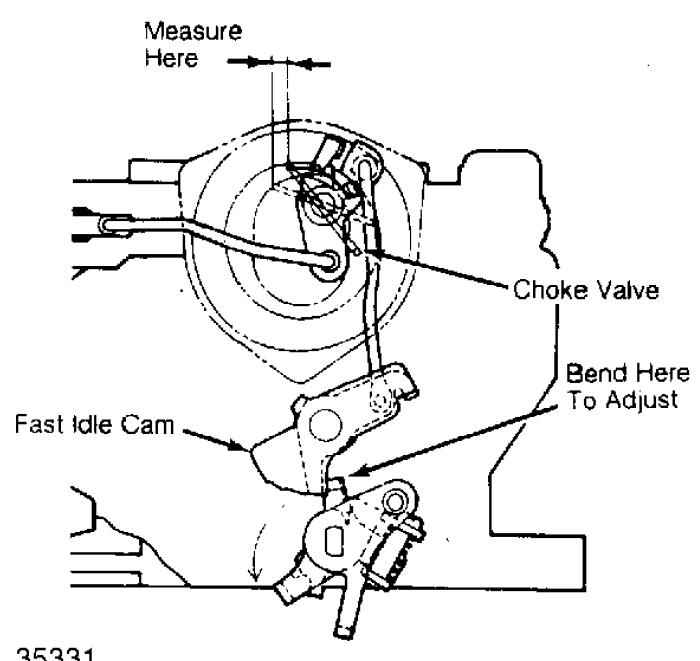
Adjusting Fast Idle Cam (Choke Opening Angle) Courtesy of Mazda Motors Corp.
